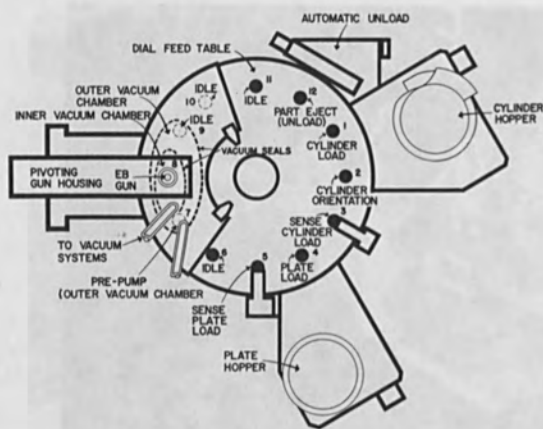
Schematic Layout: 12-Station, Sliding Seal, Dial-Feed, Fully Automated E.B. Facility That Welds the Distributor Cam at 1200 to 1500 parts/hr.
